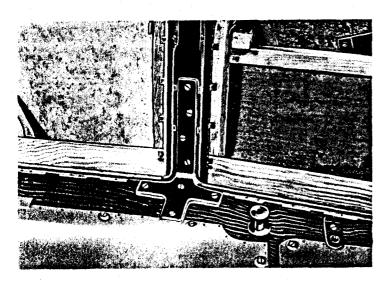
Illustration No. 36 Close Up of Center Body Pillar Brace and Sill.
